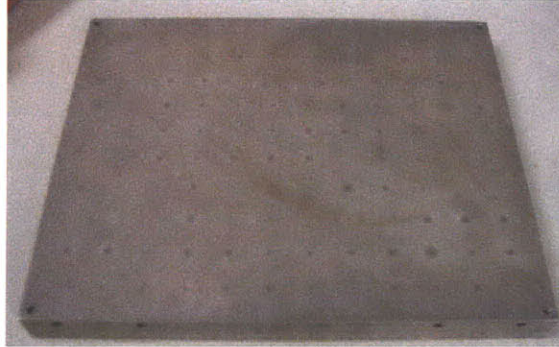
Stainless Steel Vacuum Chuck Designed and Machined This Year
